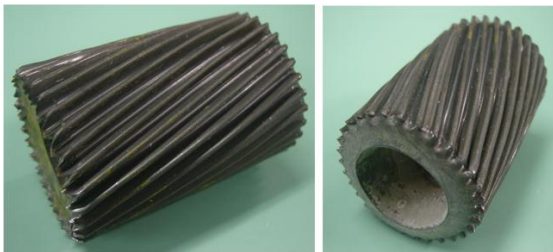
Helical gear prototype obtained by cold forward extrusion experiments
